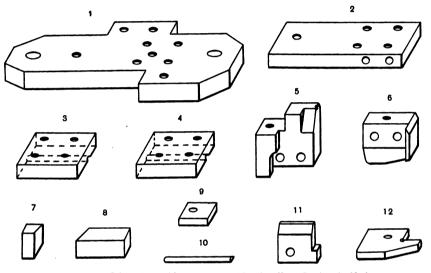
Pivotal-machine type-mould; details. Scale: half size.
